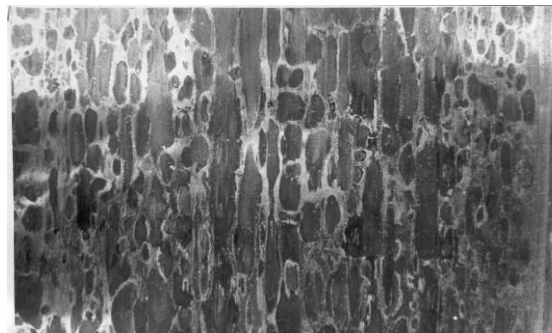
The surface of the brake pulley of the band-shoe brake of the draw works, worked out in severe conditions.
